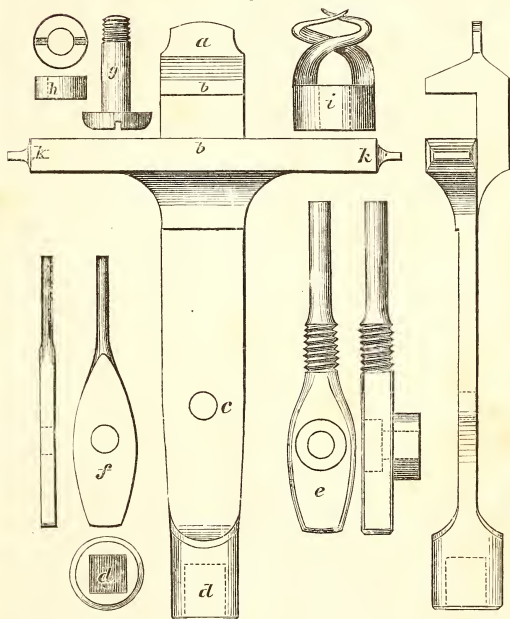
Compound appendage*, full size, embracing the vise for mainspring; cone-wrench; 3 screwdrivers; tumbler-punch; vent-wire; wiper and ball-screw, viz: *a*, screwdriver for butt, tang, and guard screws; *b*, mainspring vise; *c*, hole for screw; *d*, tumbler-punch; *e*, cone-wrench; *f*, vent-wire; *g*, screw; *h*, nut; *i*, wiper and ball-screw; *k*, screwdrivers for lock screws.
